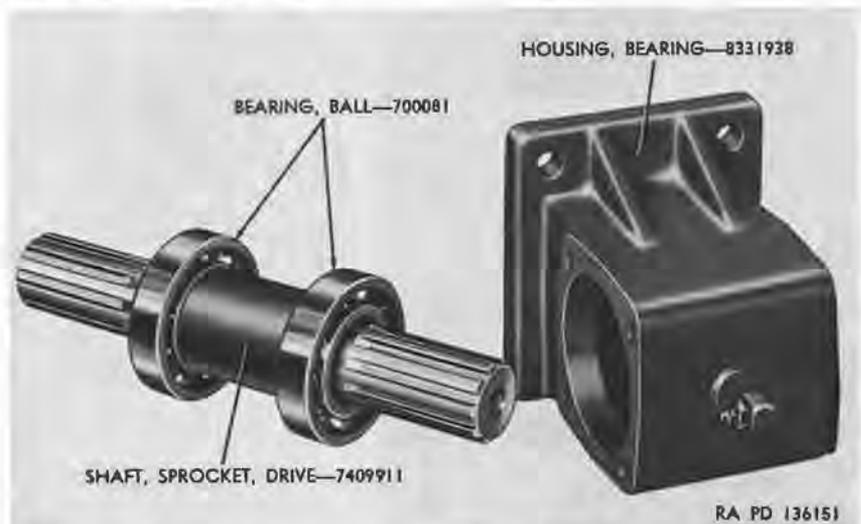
Removal of drive sprocket shaft and bearings from bearing housing.
